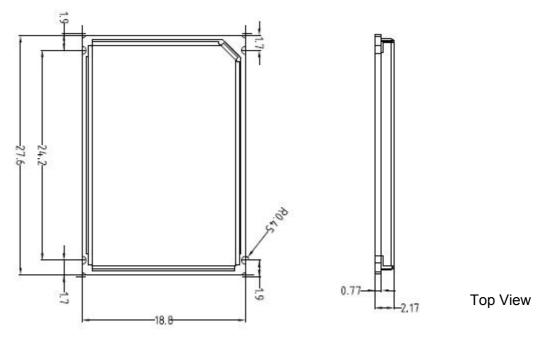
Dimensions of EMS31-X (all dimensions in mm, with tolerance +0.19/-0.1mm)
